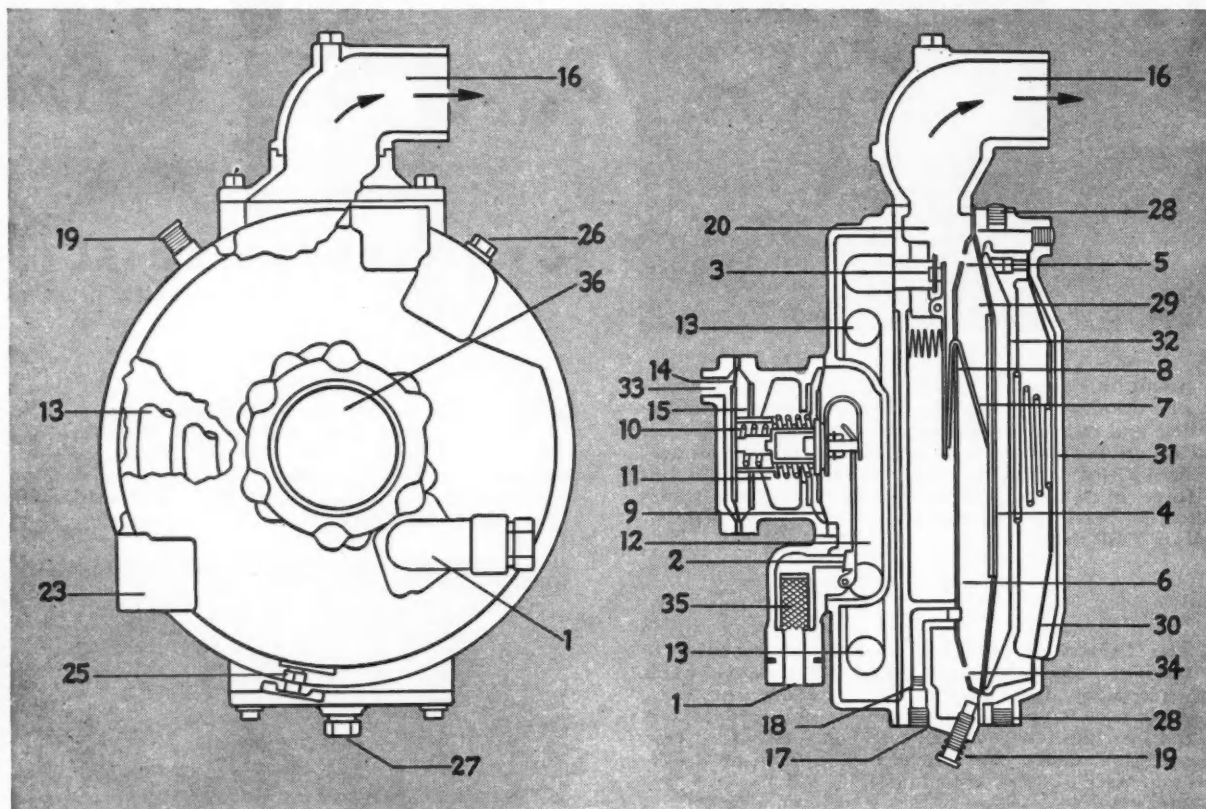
Schematic drawing of the Ensign regulating unit, with high pressure regulator, heat exchanger, low pressure unit combined. See text for nomenclature and discussion of operation of this component
